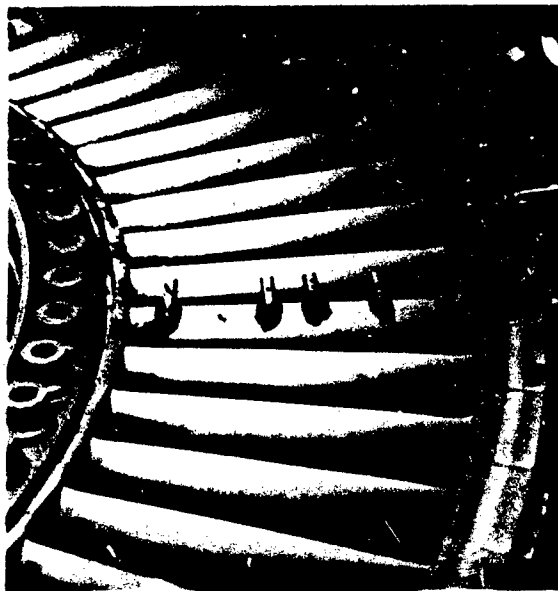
Build IV, Second Nozzle Vanes, Leading Edge Showing Cut-Back Inside Diameter Platforms and Tripwires (XPN-23421)
